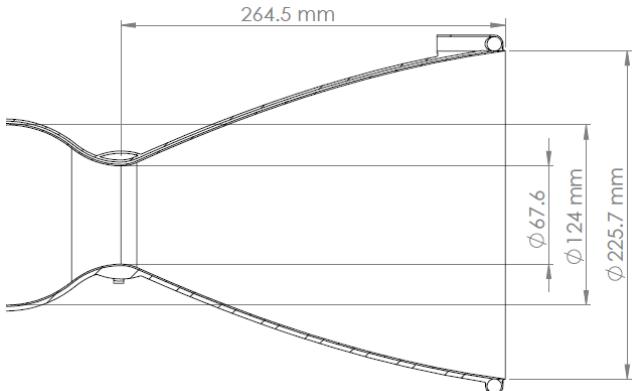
1ST STAGE NOZZLE DIMENSIONS
